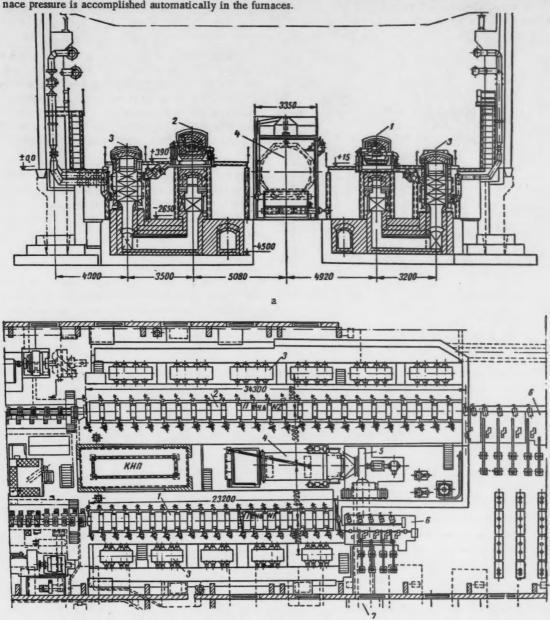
Section furnaces of the ball-rolling mills 40-80 and 80-125; a) Cross section; b) in plan; 1) furnace No. 1; 2) furnace No. 2; 3) recuperator; 4) waste-heat boiler; 5) exhaust fan; 6) charging device; 7) flue.
